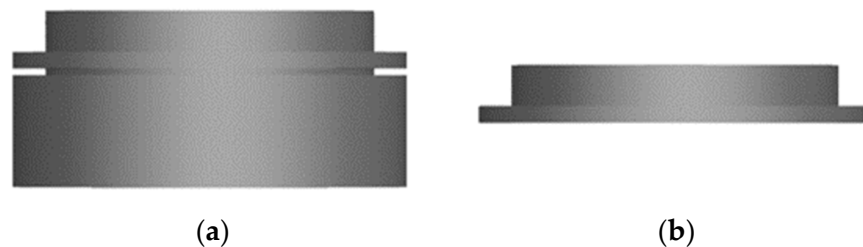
CAD drawing of the 3D-printed blanks from the side view (a) directly after 3D printing and (b) after removing the bottom part.
